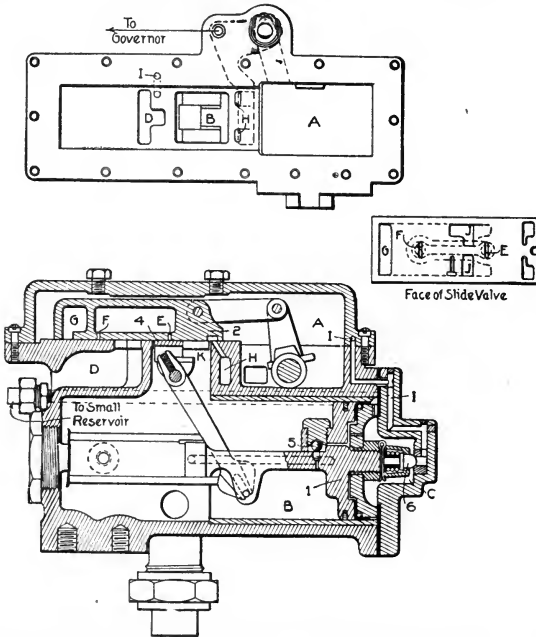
Longitudinal Section of New York Engineer's Brake-Valve in Running Position. Showing also Plan of Valve-Seat (at top) and Face of Slide-Valve (at right).
